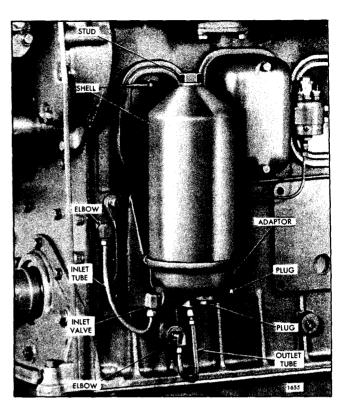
· Typical Lubricating By-Pass Oil Filter Mounting
